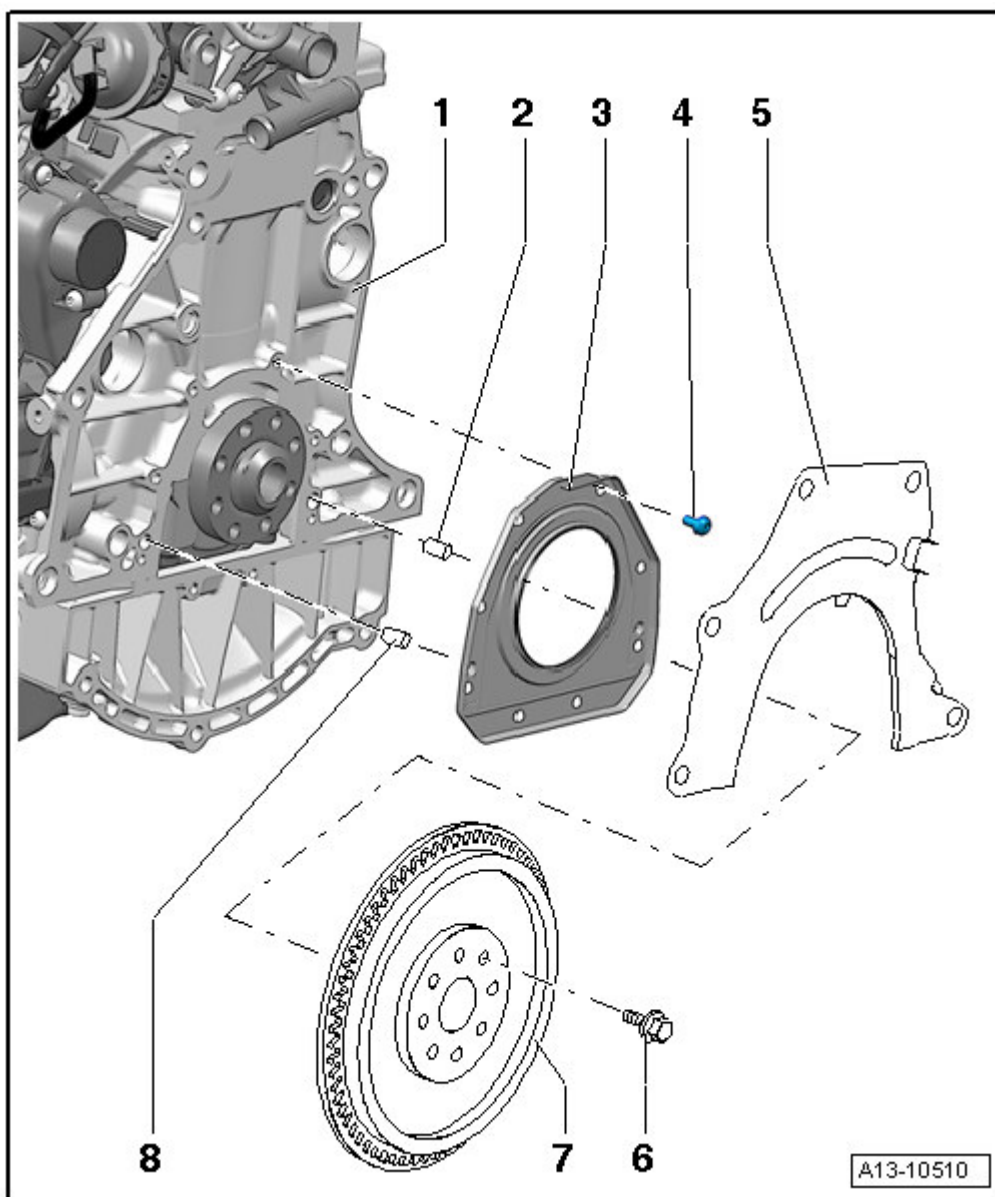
Identifying Sealing Flange And Dual Mass Flywheel Assembly Overview
